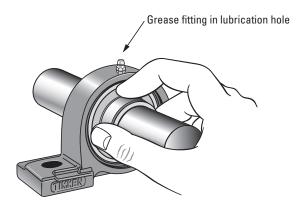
Installing grease fitting into threaded lubrocation hole.
